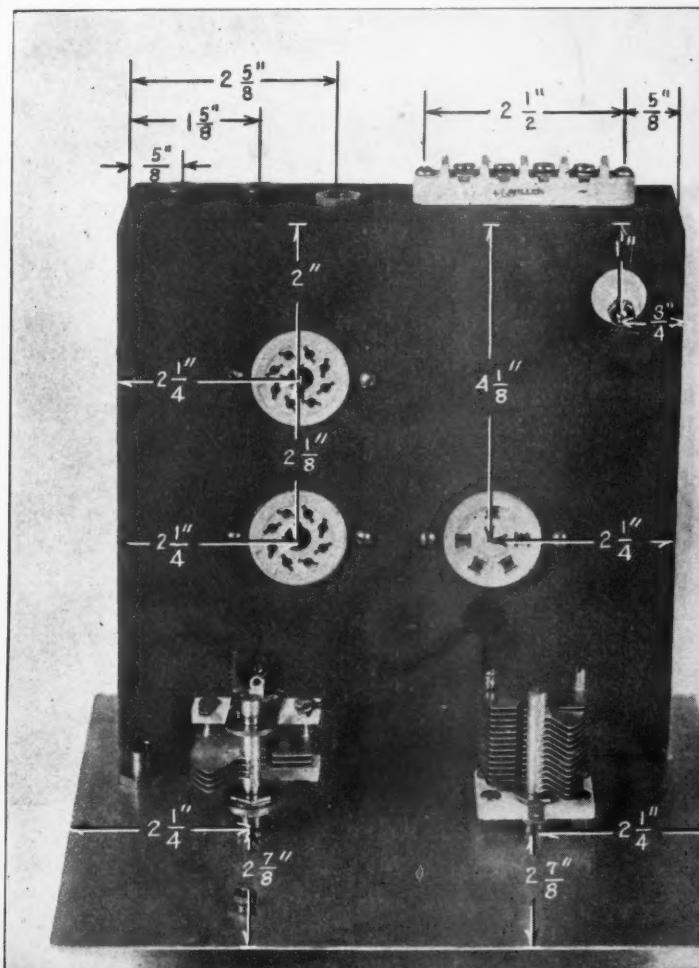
Top view of the receiver chassis. In this view, the socket for the 6J5 detector is at the lower left, above the bandspread tuning condenser. The 6SN7GT socket is near the rear of the chassis, and the coil socket is at the right above the band-set tuning condenser. The terminals on the rear chassis edge are, from left to right, the phone jacks  $J_3$  and  $J_2$ , the key jack  $J_1$ , and the terminal strip for connection to the power supply. The antenna terminal is in the upper right corner. Dimensions are marked on the photograph for location of holes.
